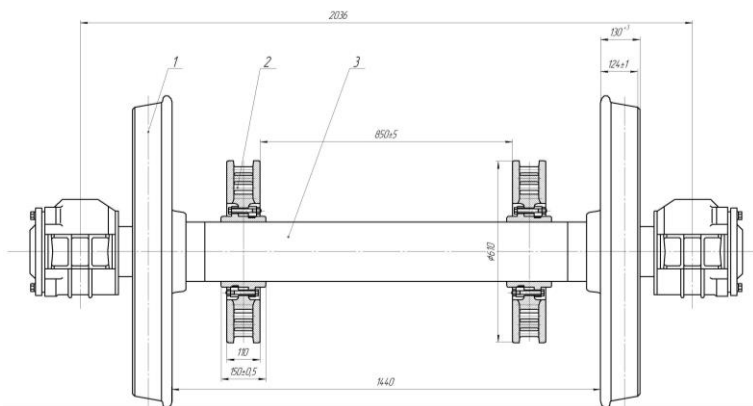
Wheelset with a disc brake of the model 18-100 freight bogie:
